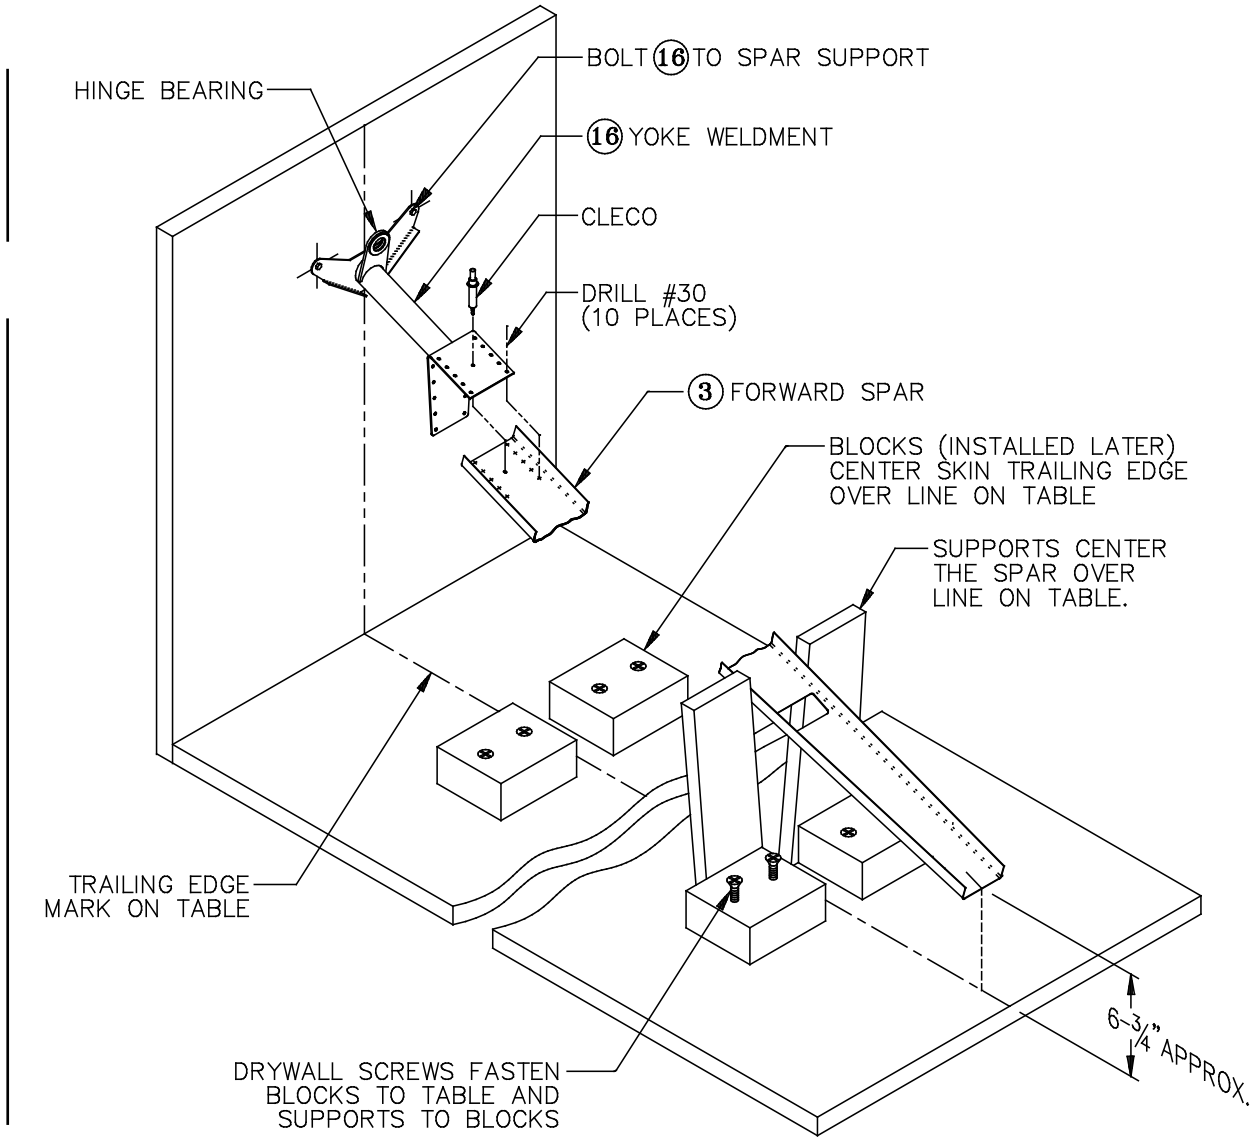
Forward Spar/Yoke Weldment Assembly
